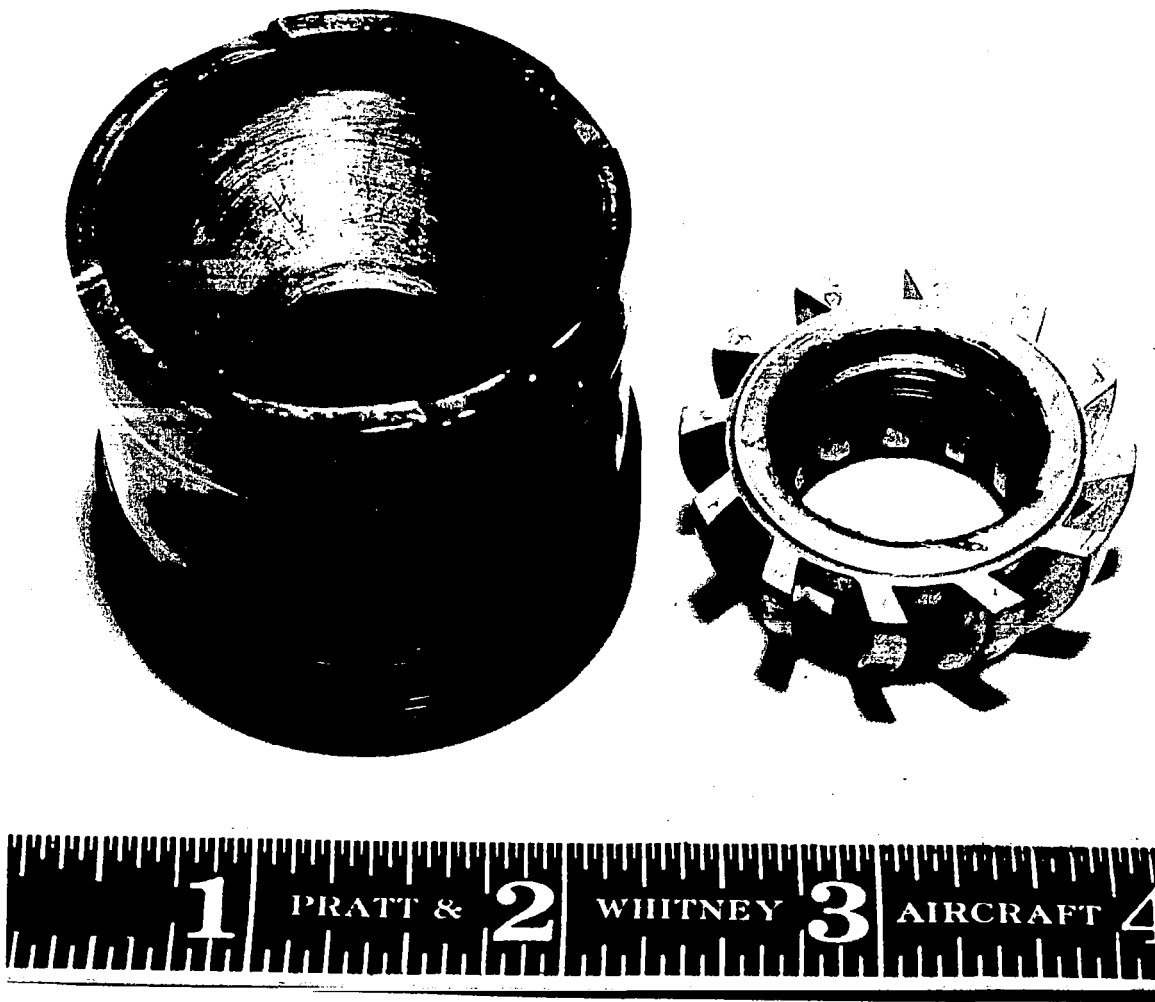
Locking Nut and Inlet Housing of Turbine-Compressor after 500 Hours of Test
